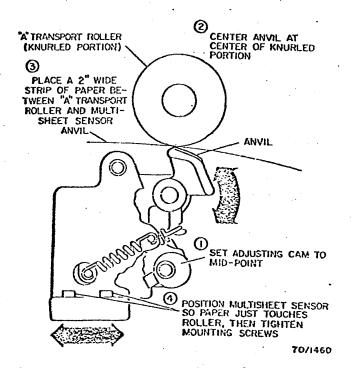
Multi-sheet Sensor (Side-to-Side Adjustment)
